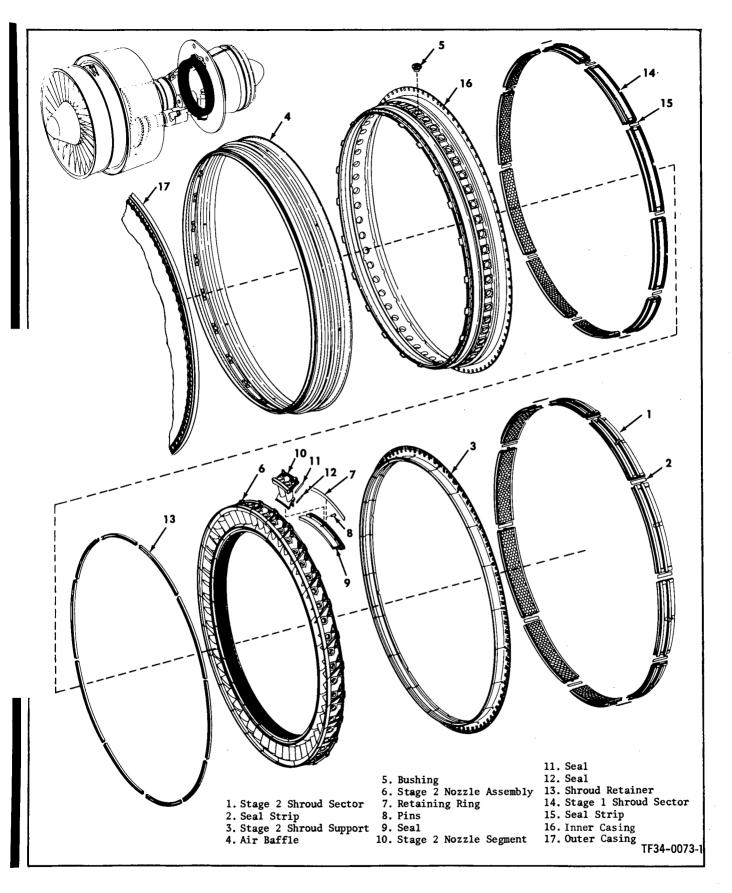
Removal of High-Pressure Turbine Stator Components
